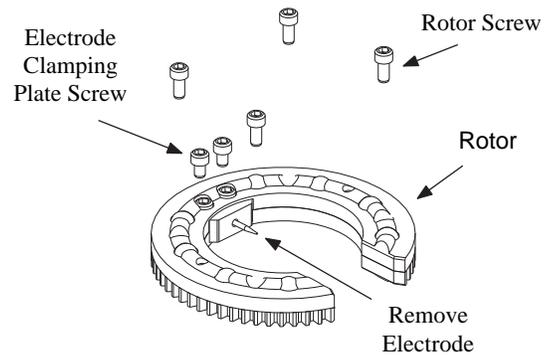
Removing the Rotor and Electrode Clamping Plate Screws
